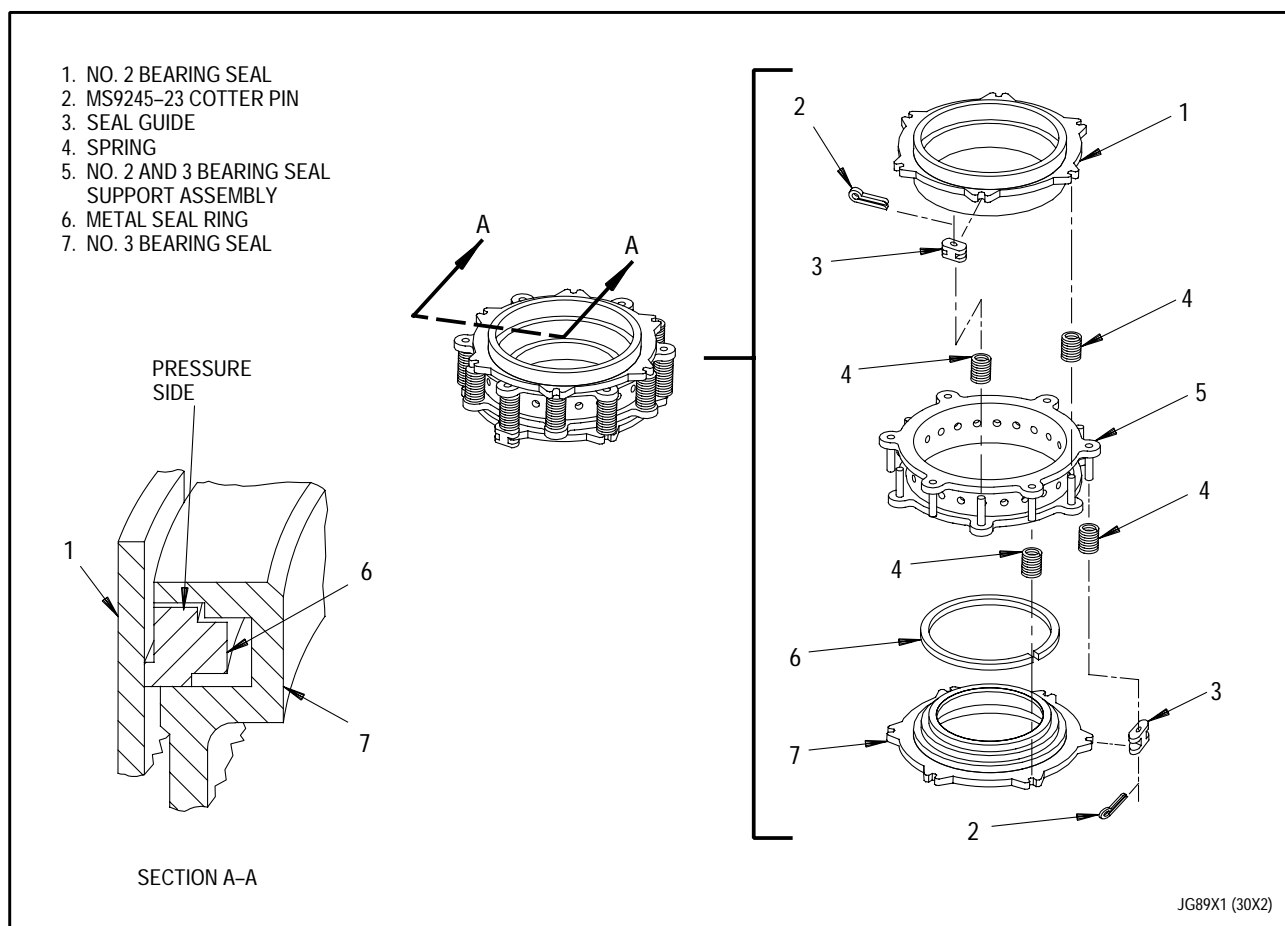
No. 2 and 3 Bearing Seal Assembly - Assembly
